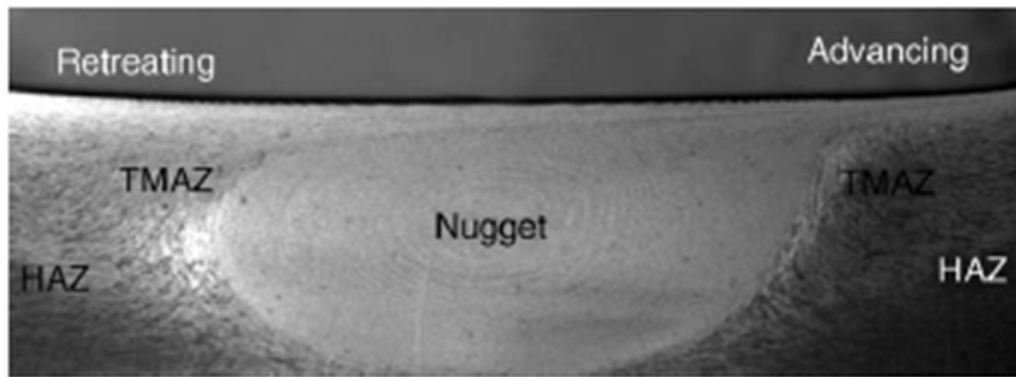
Typical macrograph of friction stir weld from Mishra [from 121]. The alloy shown is AA7075.
